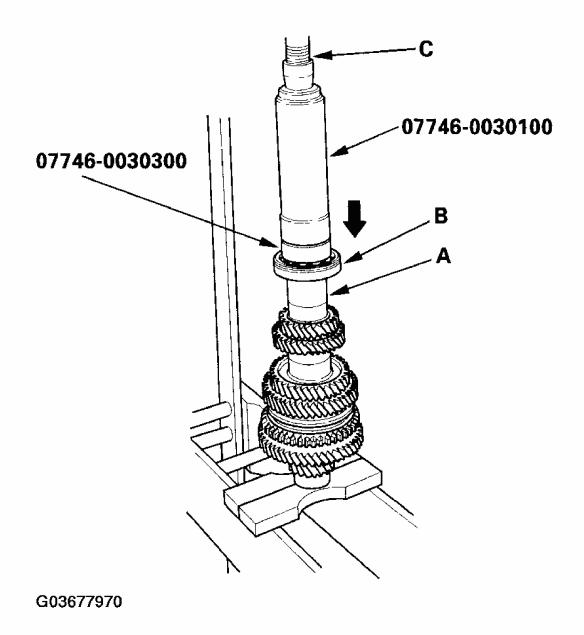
Installing Distance Collar, 35mm Shim And Old Ball Bearing Courtesy of AMERICAN HONDA MOTOR CO., INC.
